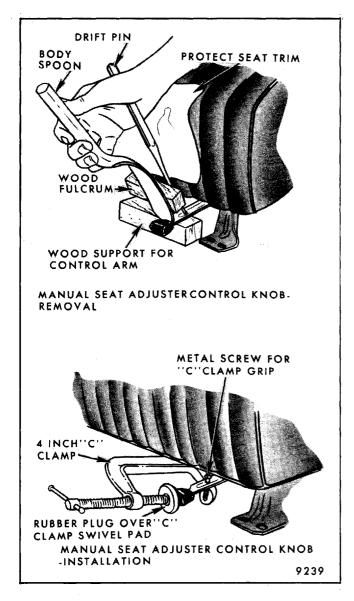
Front Seat Adjuster Control Arm Knob - Removal and Installation
